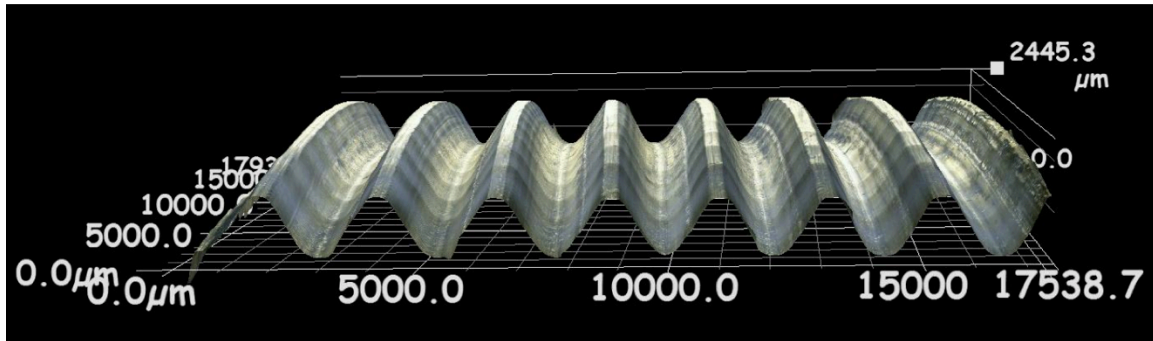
3D scan of pure aluminum threads machined into the cold sprayed coating.
